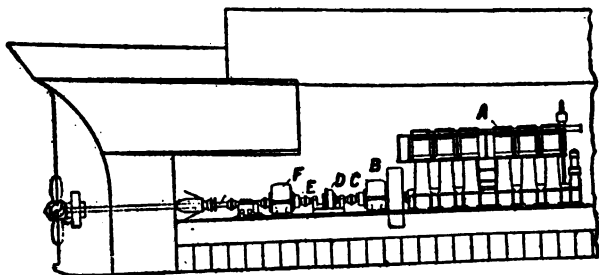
,217.—The Menless system of propelling ships by gas engines. In the figure A, is a six cylinder gas engine coupled to a dynamo B. The shaft C, of the dynamo and engine is adapted to be connected by a clutch D, with the shaft E, of the electric motor F, which is connected with the propeller shaft. *In operation* at all ahead ship speeds direct driving may be employed, but, for speeds less than half, the electrical transmission may be used, the motor F, receiving electrical energy from the dynamo B. The drive may also be employed for reversing the astern speed by not greater than half the full ahead speed, suitable switches and gear being provided.
